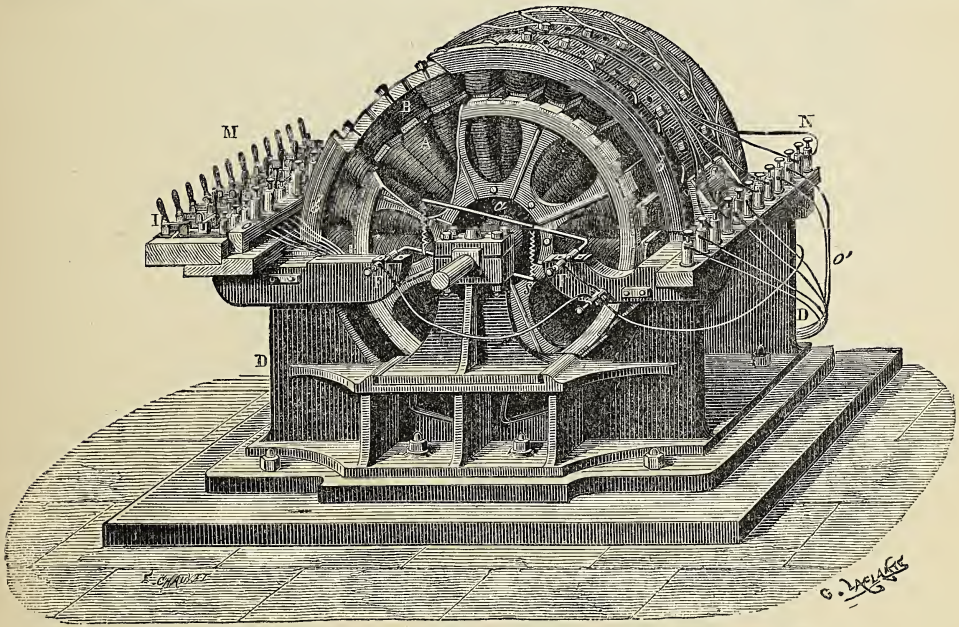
Lontin's Magneto-electric Distributing Machine, perspective view.
